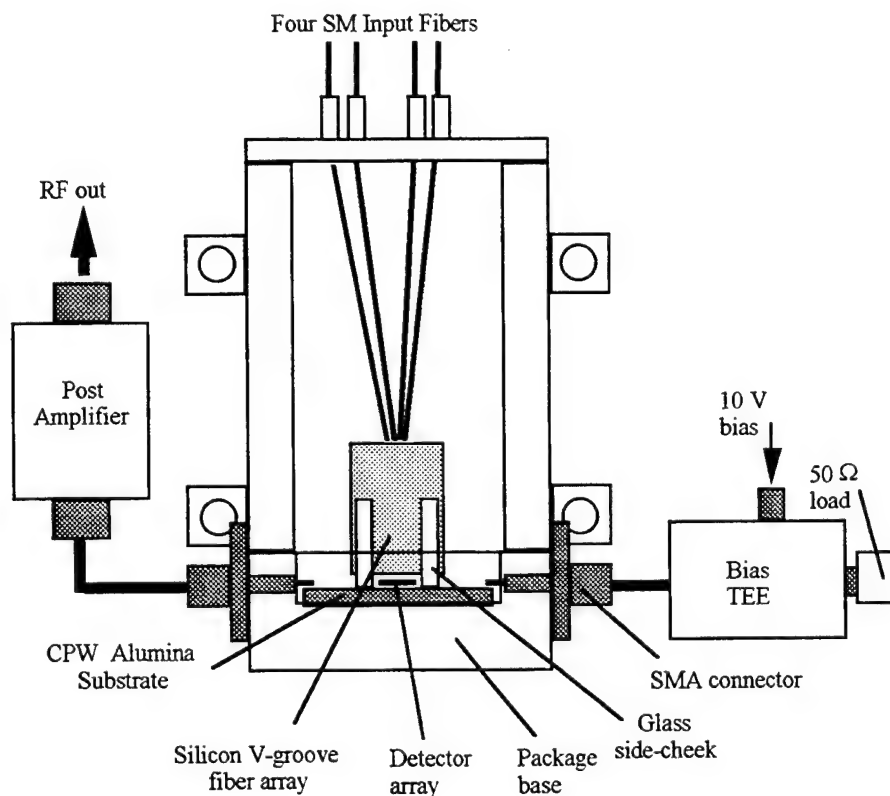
Schematic of a packaged MIR illustrating the basic assembly interfaces.
